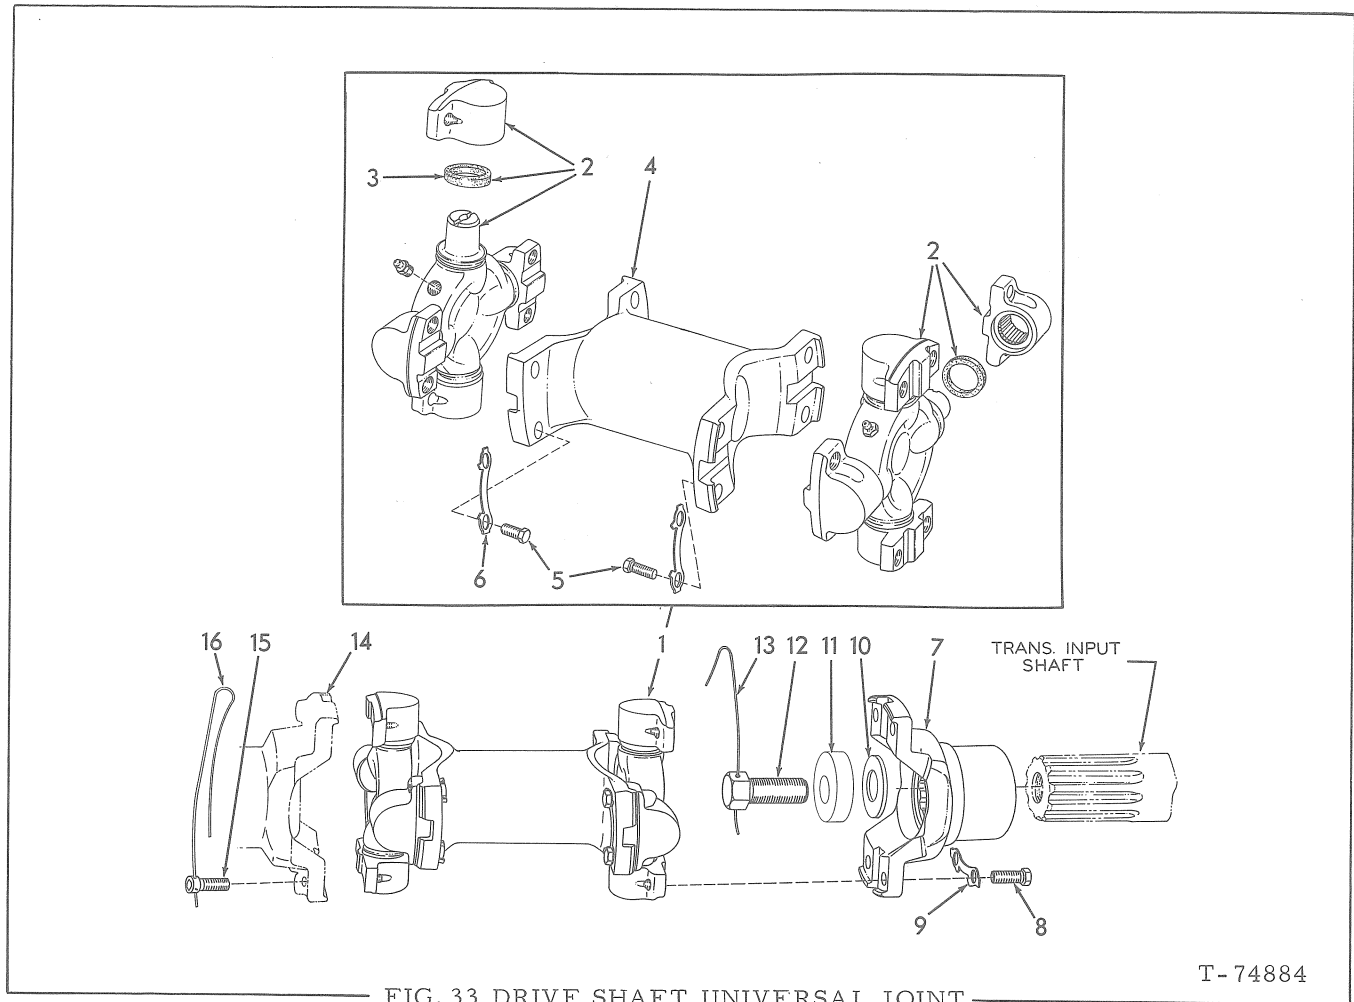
DRIVE SHAFT UNIVERSAL JOINT
